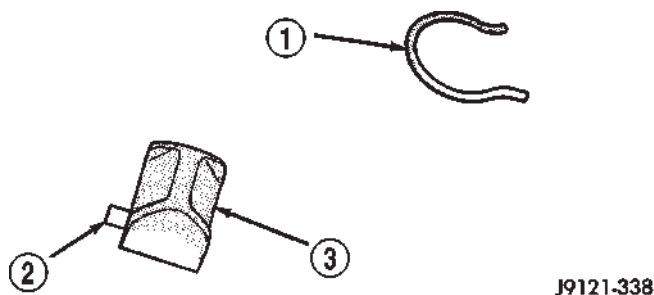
Reaction Plug Locating Pin And Snap-Ring
